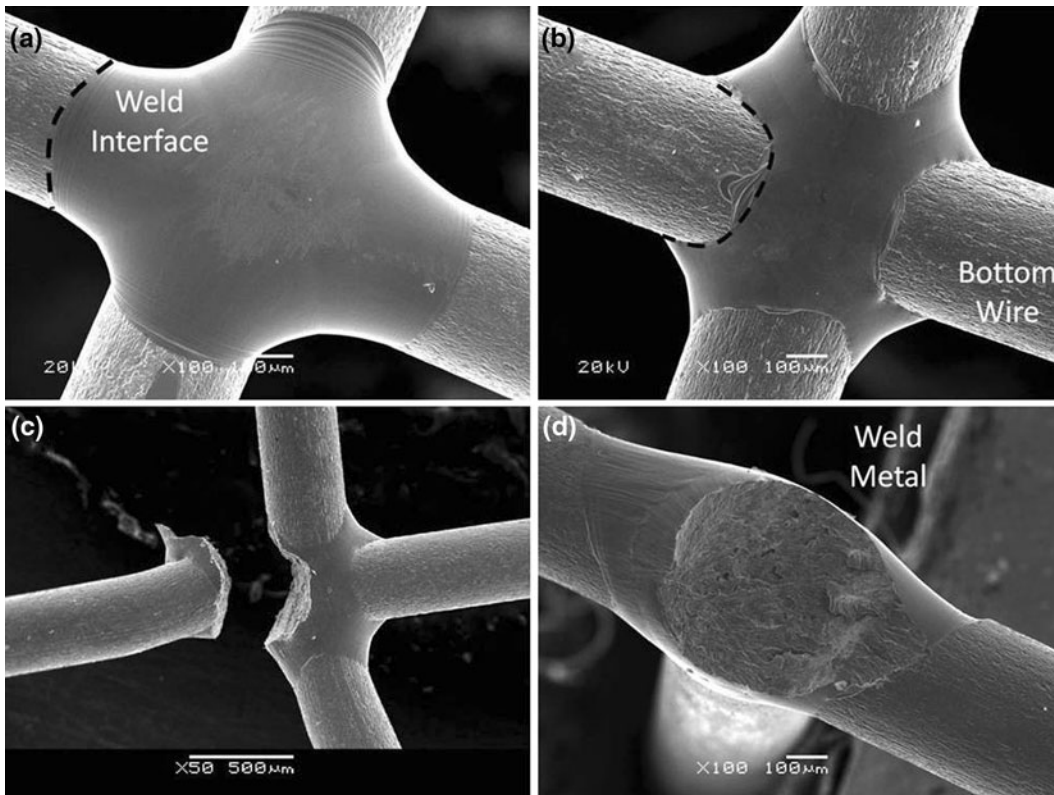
SEM images of welds made at 0.8 kW peak power for the (a) weld top, (b) weld bottom, (c) fractured weld, and (d) fracture surface.
